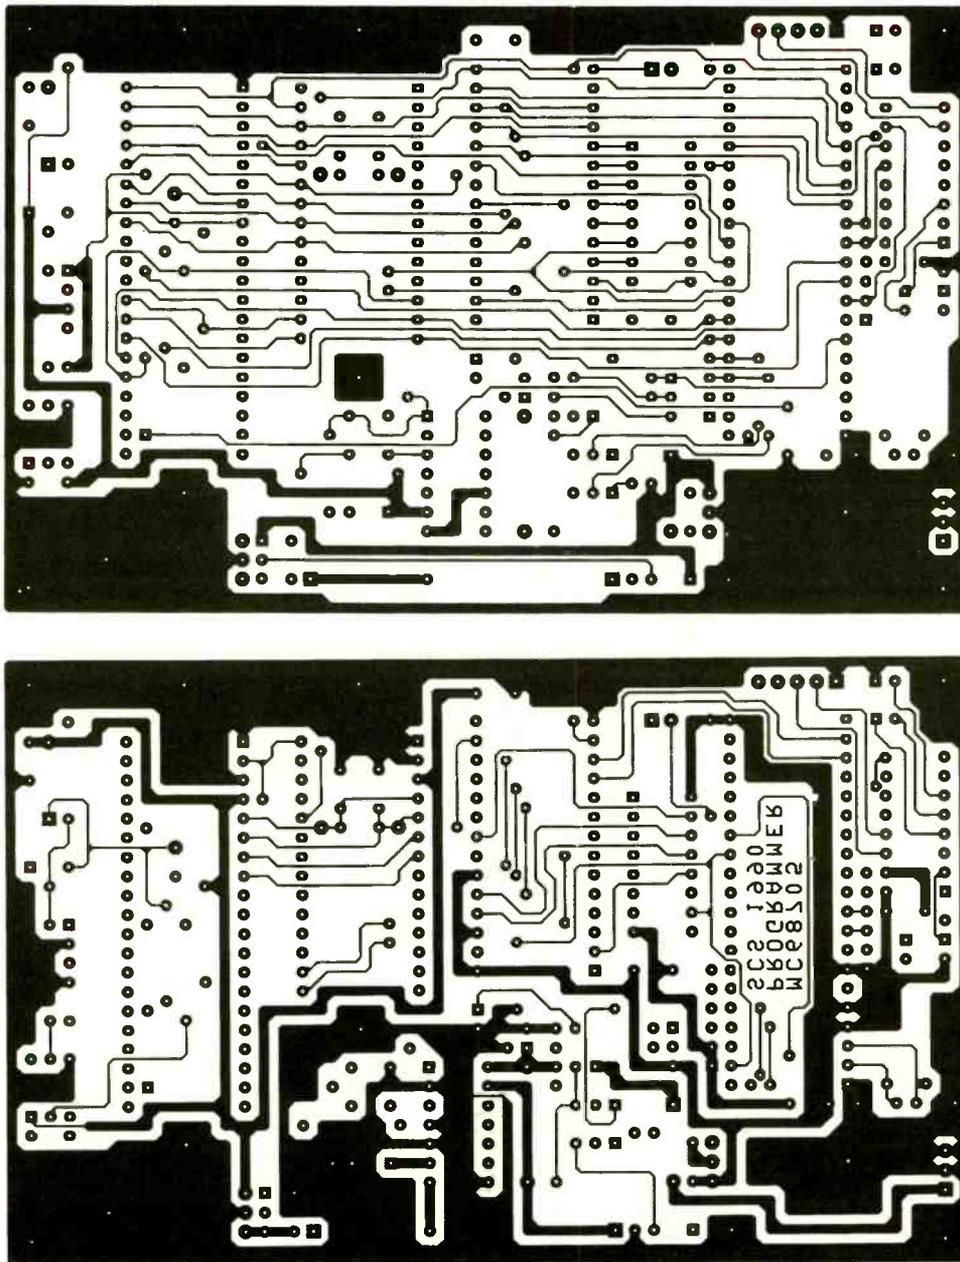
Actual-size etching-and-drilling guides for Programmer's double-sided printed-circuit board. This board should have plated-through holes; otherwise, you must solder all connections on *both* sides of board and use short wire vias in areas where component leads/pins do not bridge from one side of board to other.
